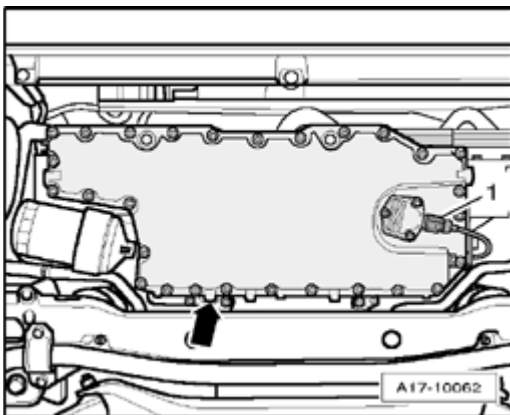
Oil Level Thermal Sensor G266 Electrical Connector & Oil Pan Lower Part Fasteners
